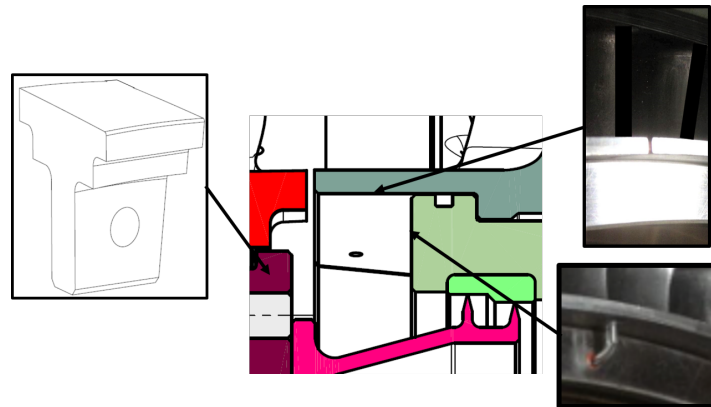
Cavity flow disturbance sources in the C2 cavity - Rotor mechanical assembly (left) - Stator sector connection seal (top right) - Instrumentation routing pipe (bottom right).
